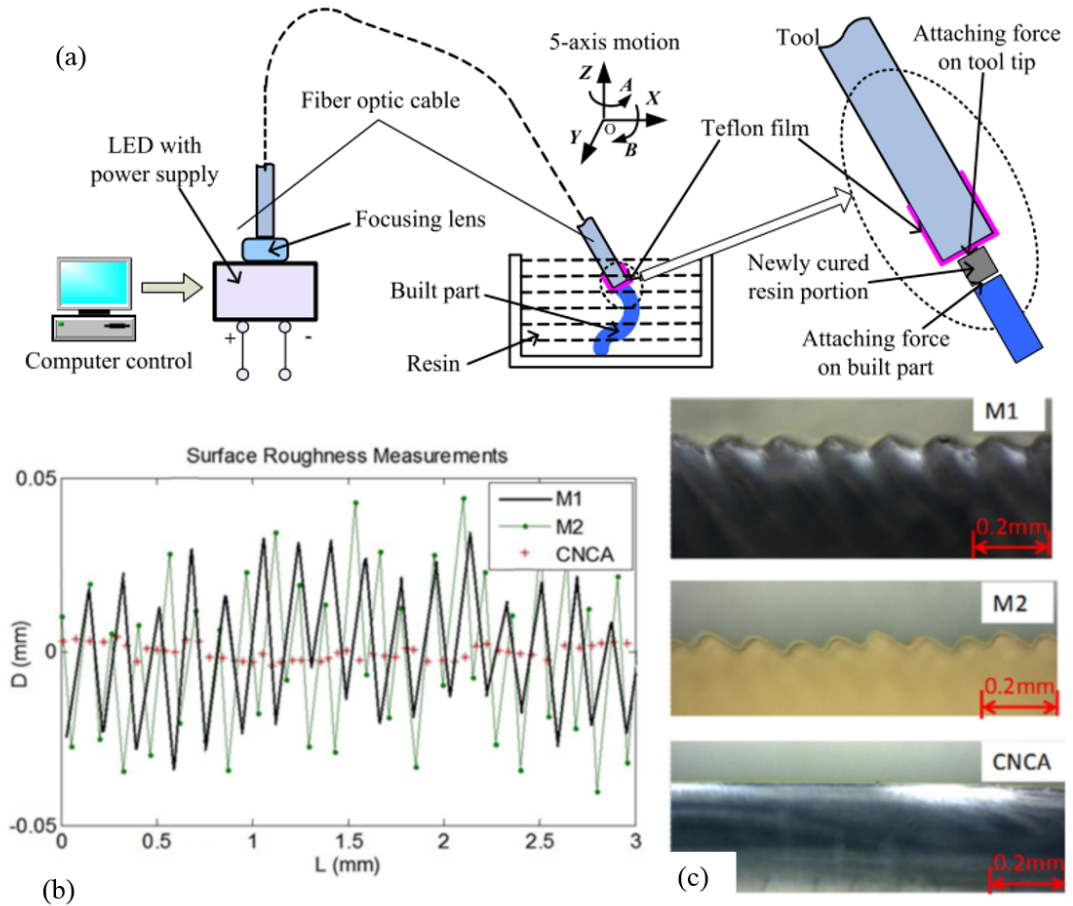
(a) Schematic of the CNC accumulation process, showing the 5-axes that the tool can move through, allowing the angle rod to be printed continuously. This yielded surface roughness improvements due to layerless AM. (b) Surface roughness measurements and (c) images of the up-facing surfaces of angled rods printed using SLA and CNCA. From [109].
